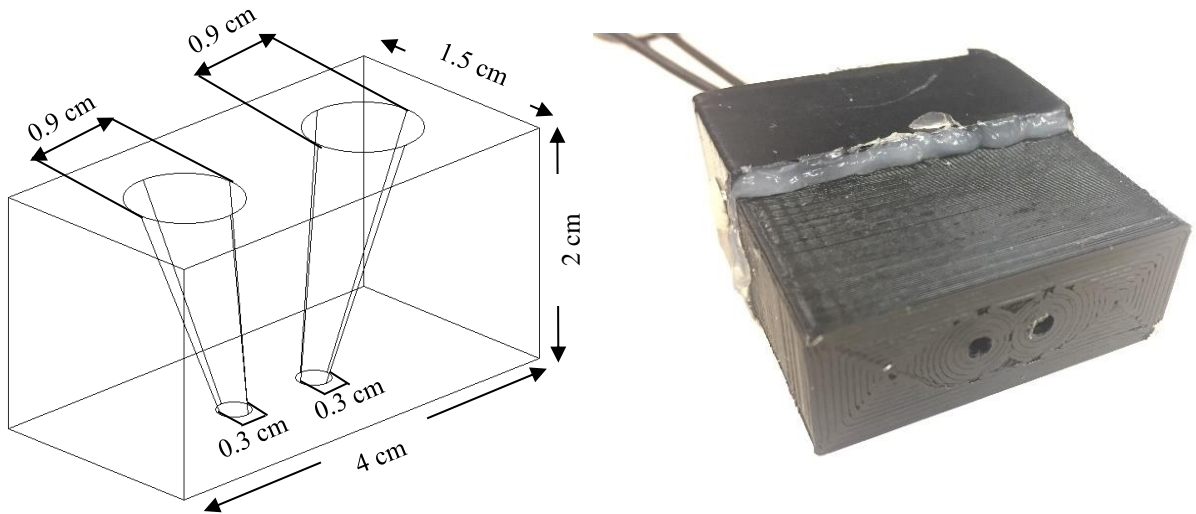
Schematic of tube adapter (left). 3D printed tube adapter mounted on the speakers (right).
